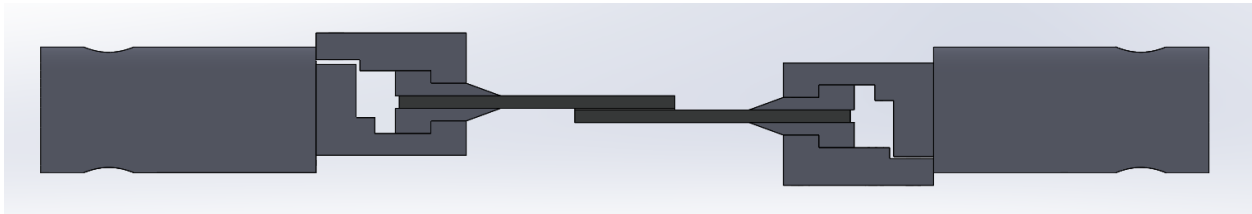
2<sup>nd</sup> grip design, the whole assembly
